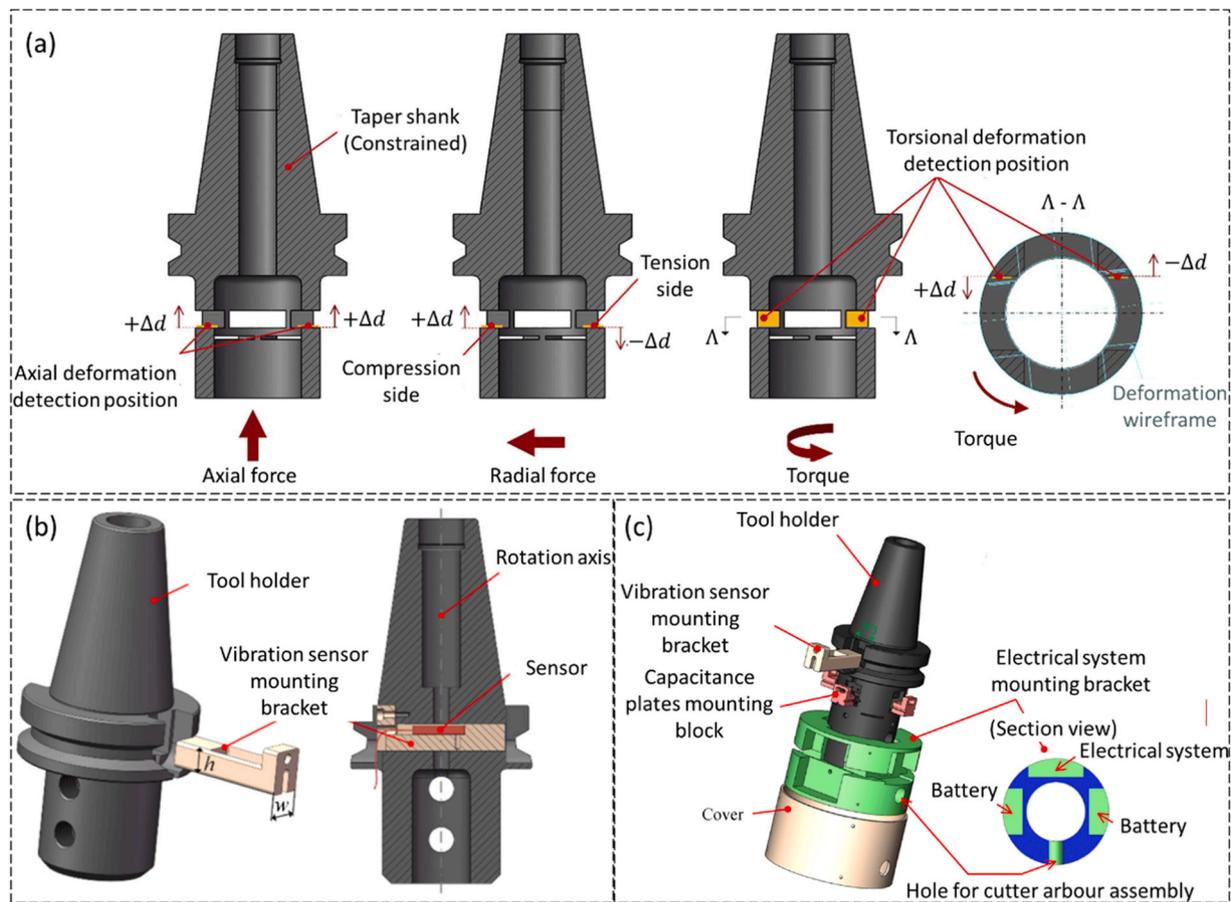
Modified tool holder by Xie et al.: (a) cutting force sensors [134]; (b) cutting vibration sensor [135]; (c) multi-sensor [136].
